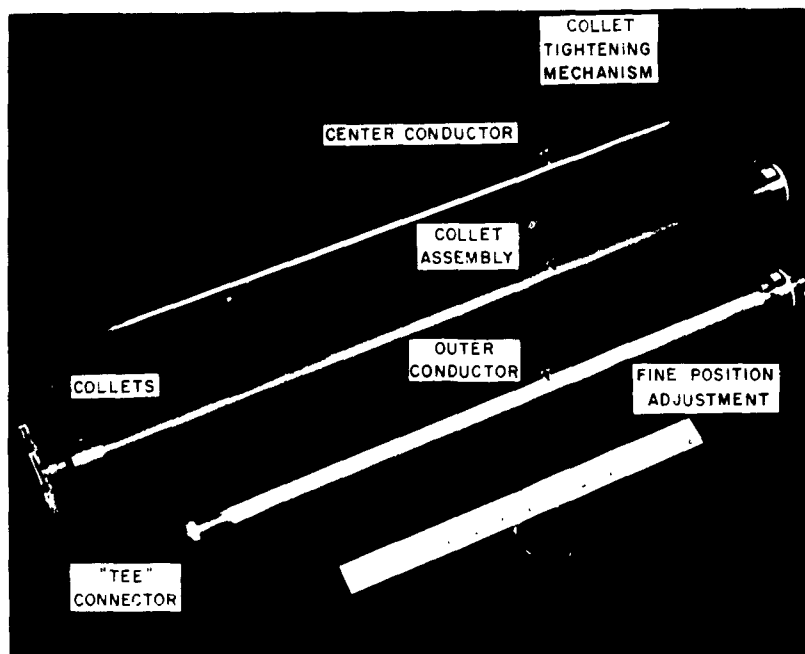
ADJUSTABLE SHORTED STUB - DISASSEMBLED
